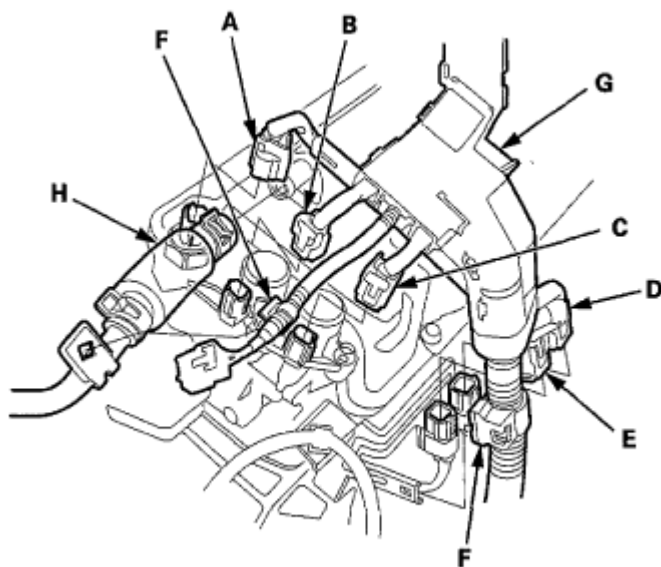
Identifying (Rear Rocker Arm Oil Pressure Switch, Rocker Arm Oil Control Solenoid, Rear A/F Sensor Connector And Rear Secondary HO2S) Connectors
